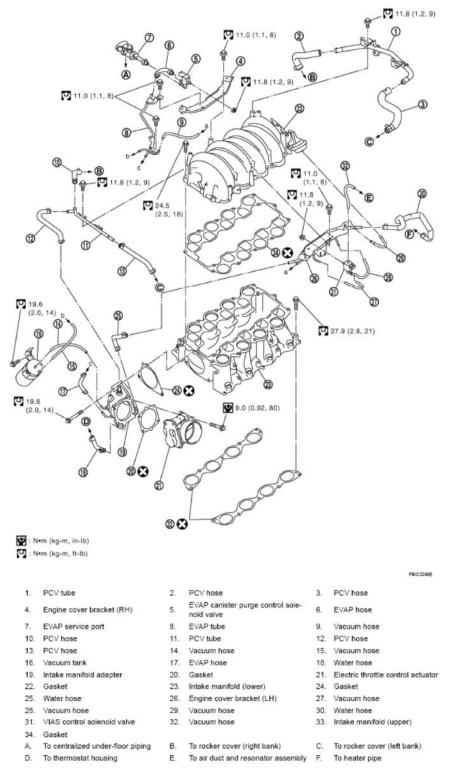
Identifying Intake Manifold Components With Torque Specifications
